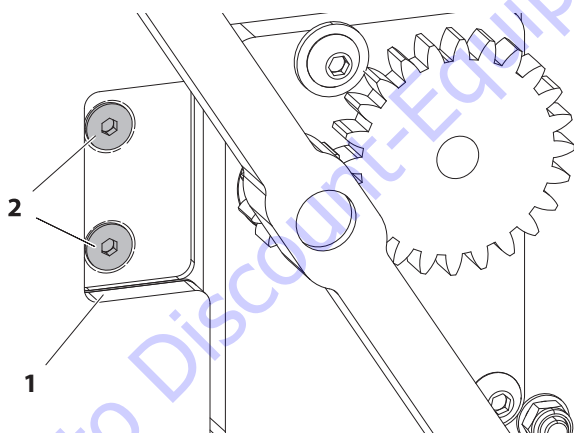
Belt Clamp Mounting Bolts - Ecolift
